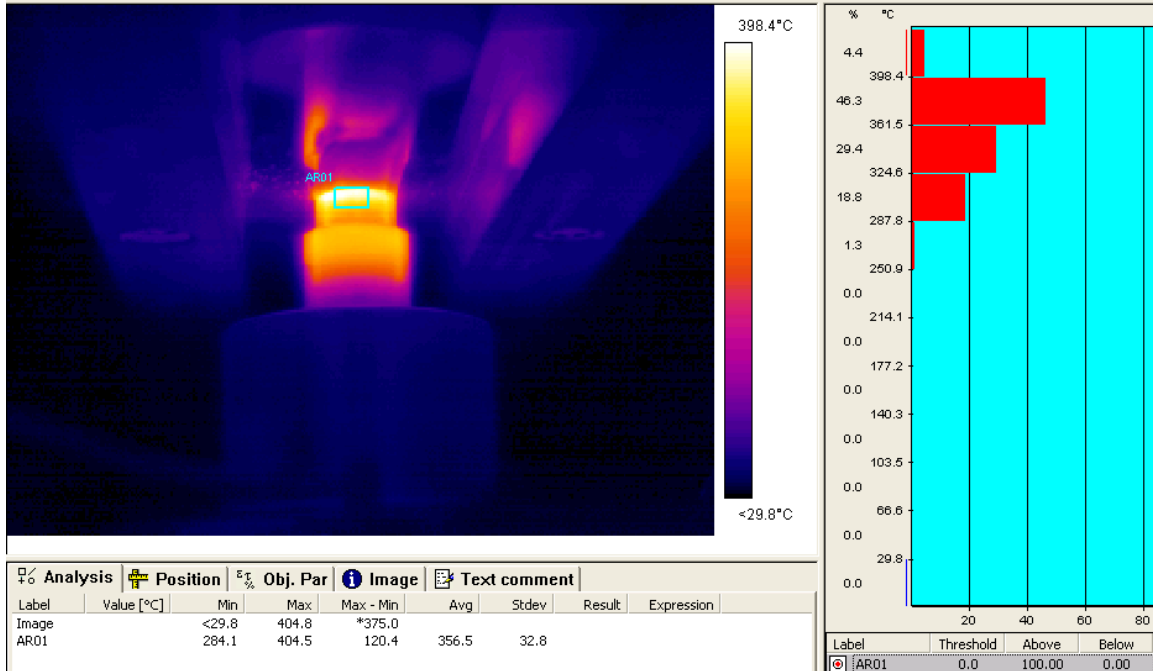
A thermal camera image taken during the steady state weld period of a 1000rpm, 4 ipm, blind-T weld
